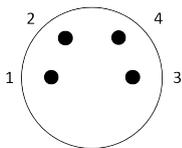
Pin assignment, M8 plug connector (top view of supply plug connector)
